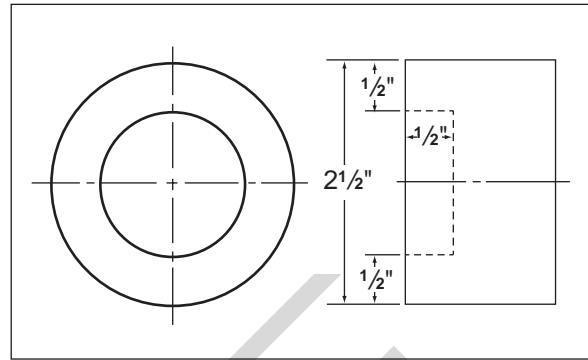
This two-view drawing shows a round object. In what instances could a two-view drawing be used to represent objects that are not round?
